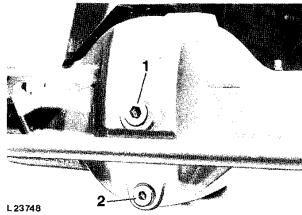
Checking Axle Housing Oil Level (up to serial no. 449 999 L)
